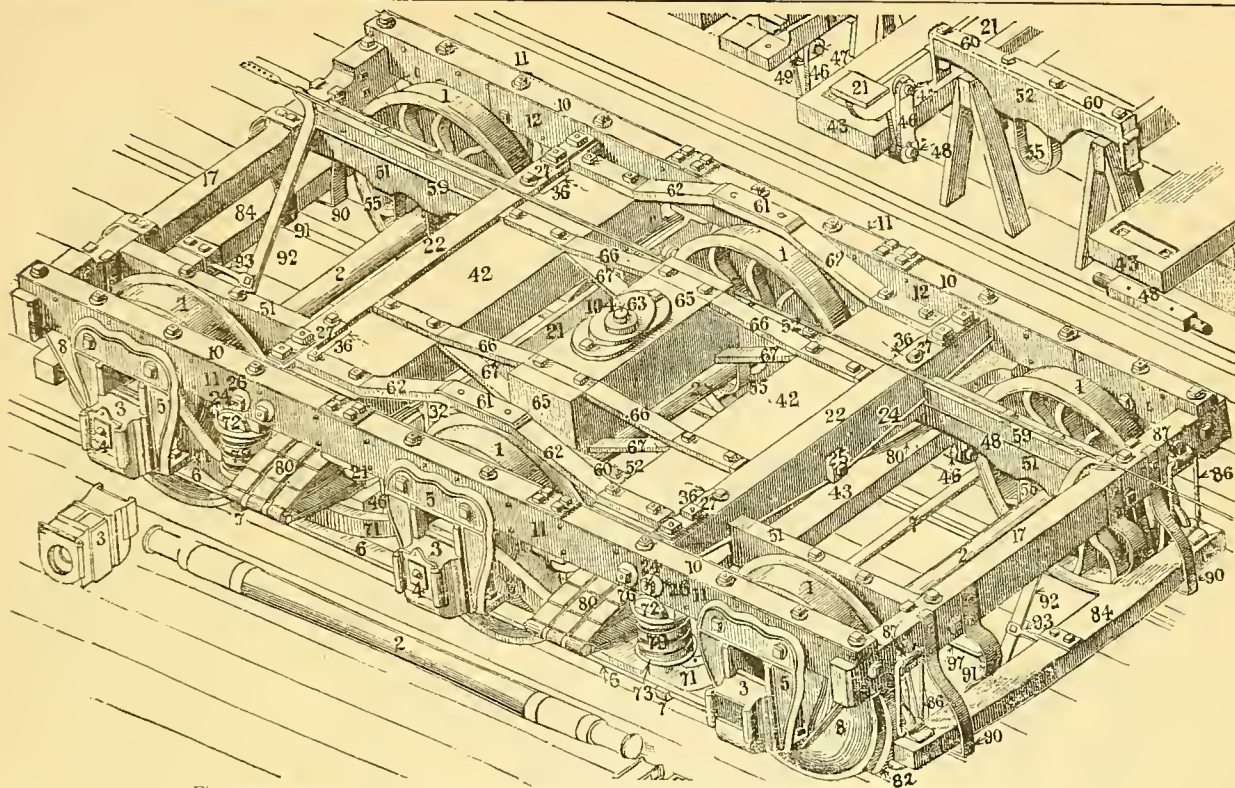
SIX-WHEEL PASSENGER-CAR TRUCK, PULLMAN PALACE CAR COMPANY. Perspective View.
